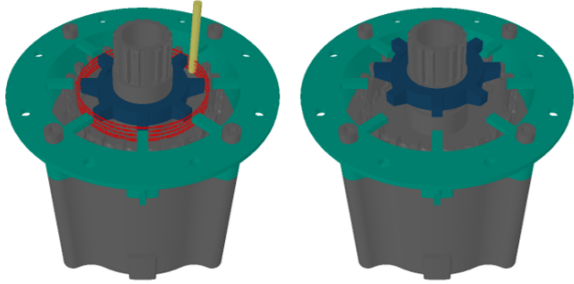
Destructive disassembly of simple dummy motor by milling and subsequent gripping.
